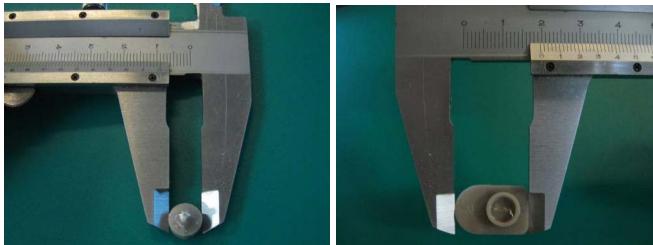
Dimension parameters of developed rotation and linear motion sensors
